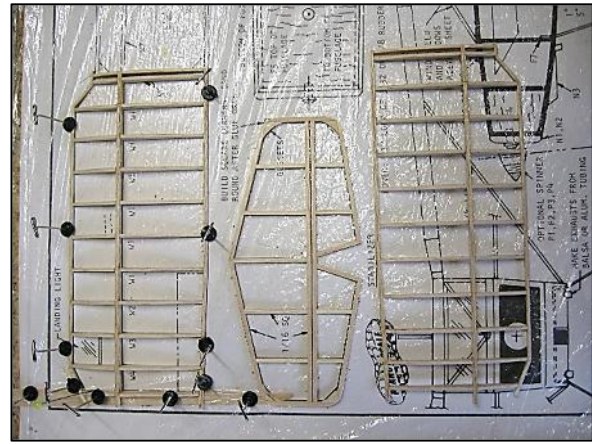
Construction of port wing panel tip. Stab frame and starboard wing panel also shown.
